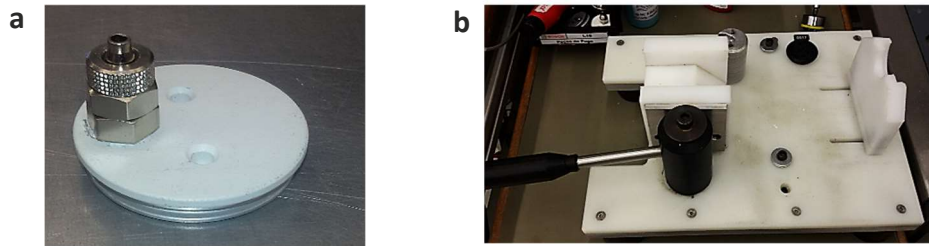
a) Special cap to plug the air tube; b) Fixture use to fix the unit to tight yoke caps.
